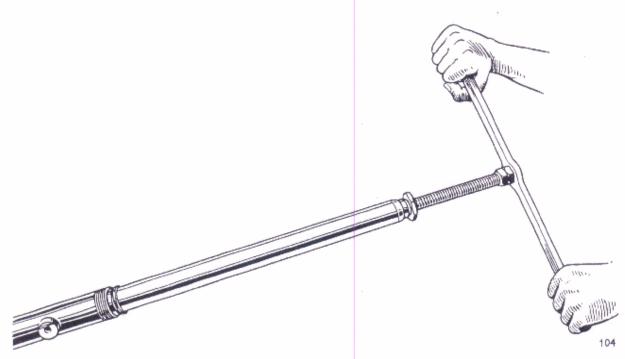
Extracting the stanchion from the bottom member using service tool Z127
